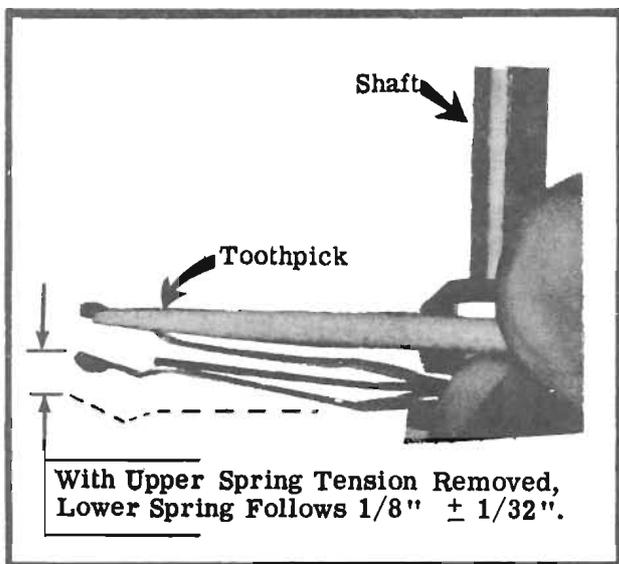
A Toothpick can be used for Checking Wiper Spring Tension (Follow) and Requirements. (Procedure Shown is Reversed When Checking Upper Wiper Spring Tension.)
